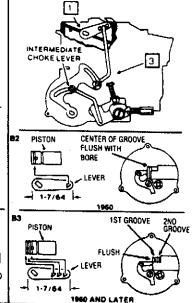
INTERMEDIATE CHOKE ROD ADJUSTMENT
